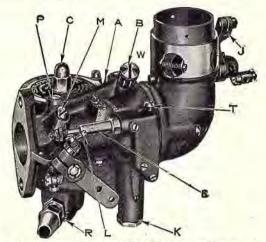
Stromberg type OS plain tube carburetor. A horizontal, single control carburetor. Made 1" and 1\(\frac{1}{4}\)" sizes.
